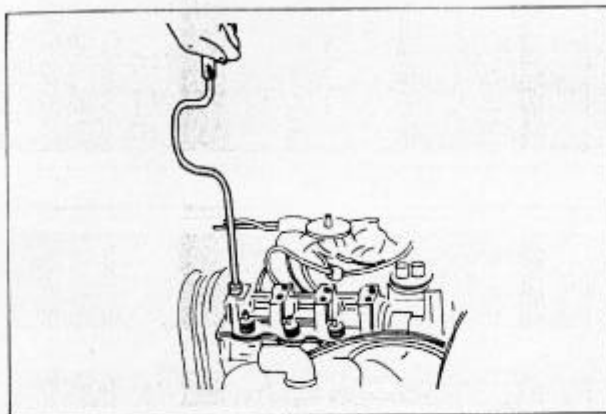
A-41 REMOVAL OF ROCKER ARM SHAFT BOLT
